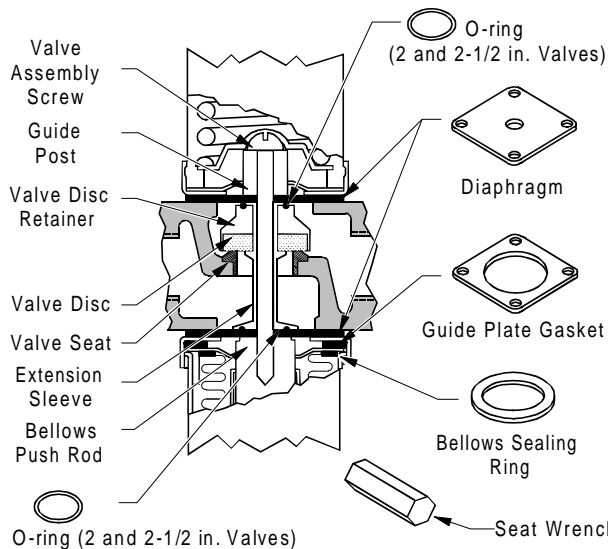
246, 247, 2 in., and 2-1/2 in. Valves
